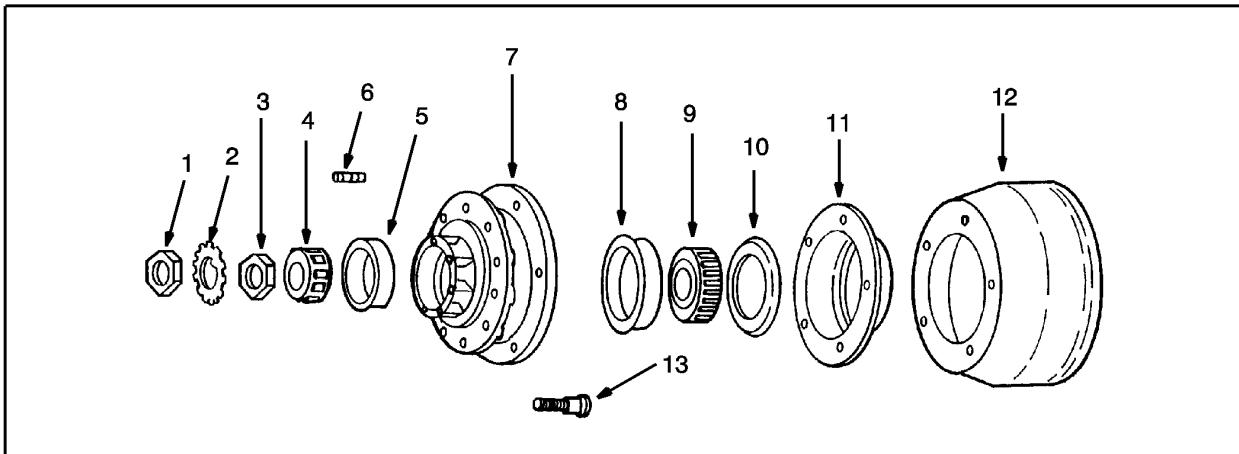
Exploded View of Typical Disc Type Rear Hub Assembly with Inboard Mounted Brake Drum
